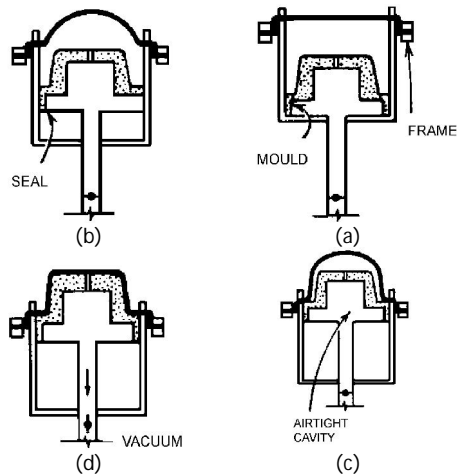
Steps in Air slip forming. a-Clamping the work piece b-imposing of air pressure c- pulp assisted forming d-imposing vacuum in the mold
